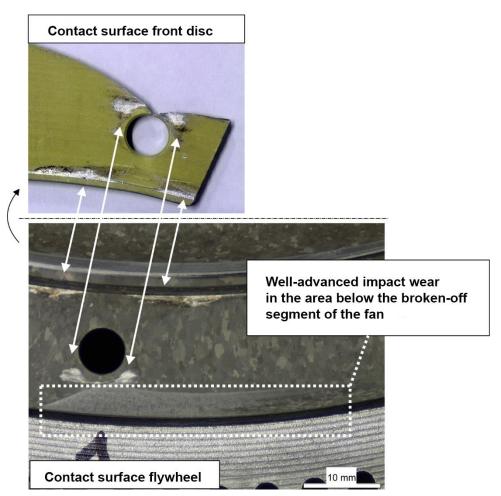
Contact surfaces between flywheel and cooling fan with the consistent impact wear in the area of mounting point 1.
